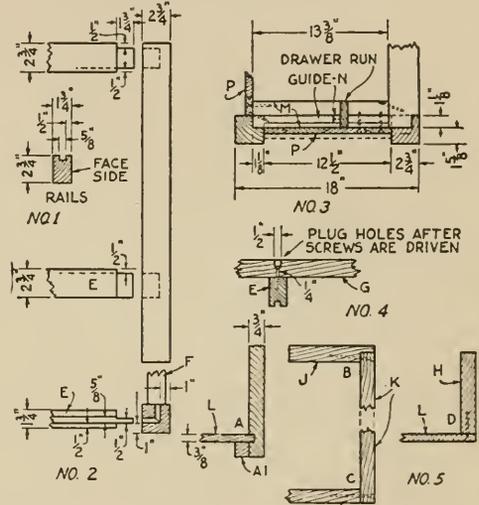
Leg and rail joints and a horizontal cross section through one end of the bench that is shown in Figs. 10 and 11; how the top is fastened and details of the drawers.
